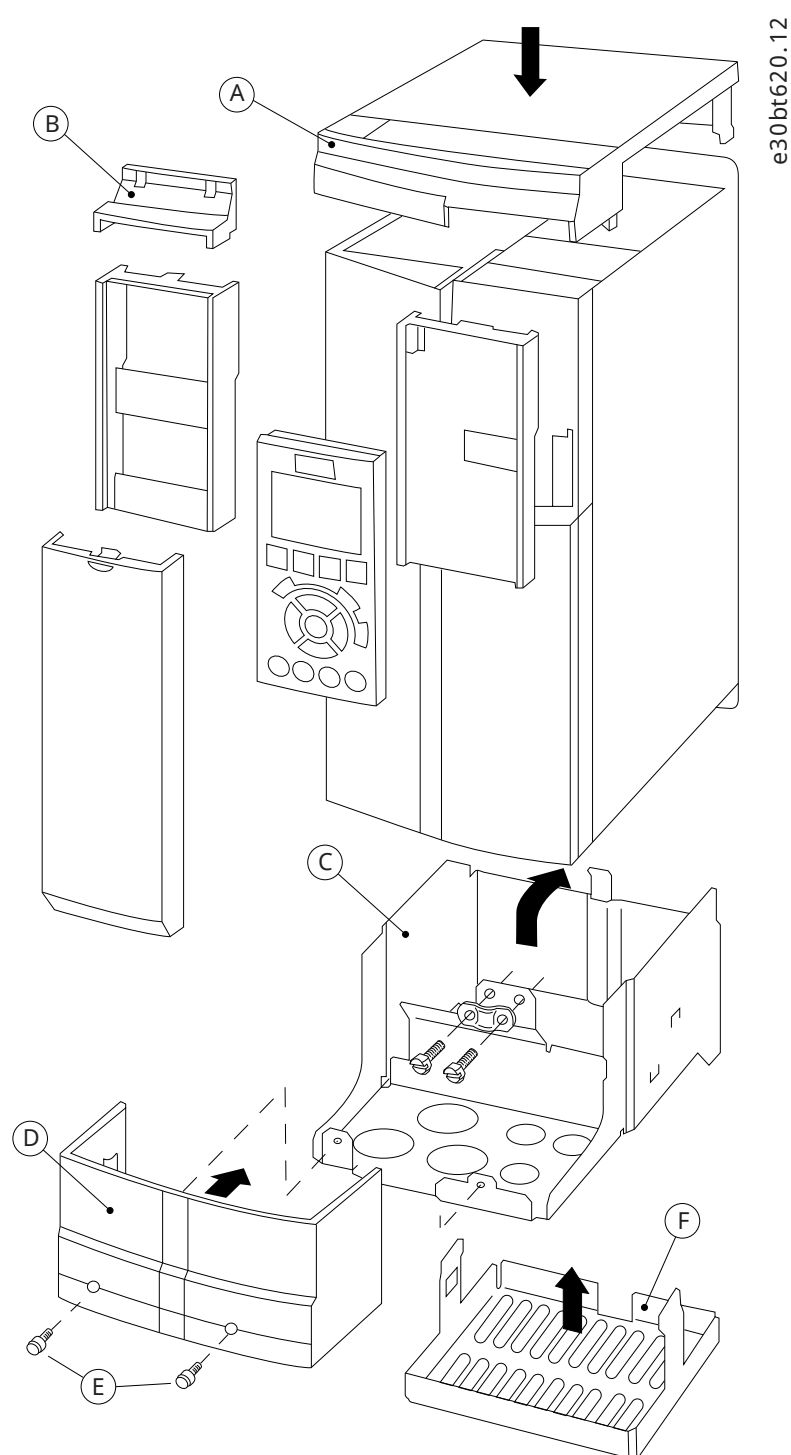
IP21/UL Type 1 Kit on a B3 Enclosure
